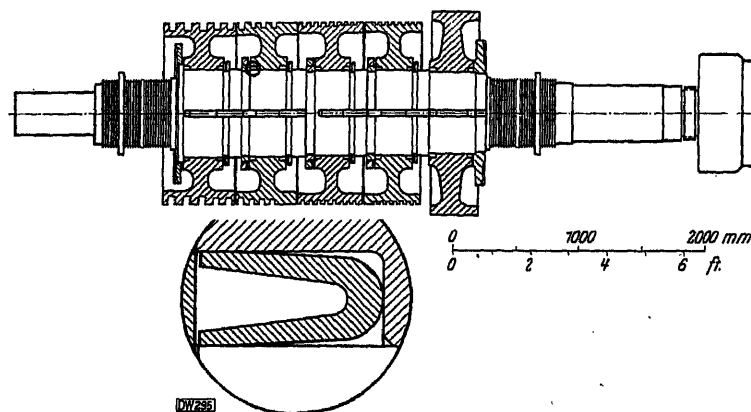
B.B.C.*, 1800 R.P.M. H.P. rotor of a 160,000 kw., two-casing, high-pressure turbine, and method of mounting discs on shafts by flexible rings of U-section
